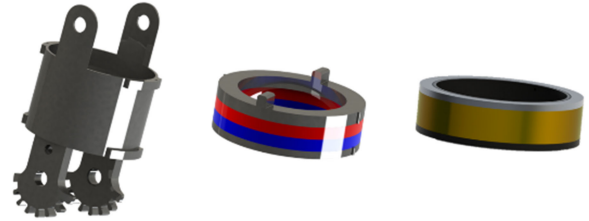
Mechanism components: joint and hook (left), magnet and pawl (center), solenoid (right).
